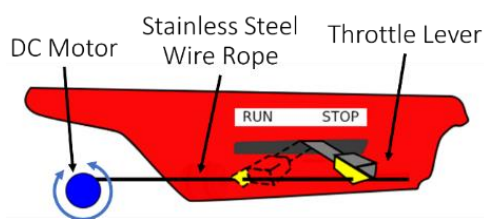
Throttle lever mechanical modification design for G1000 tractor
